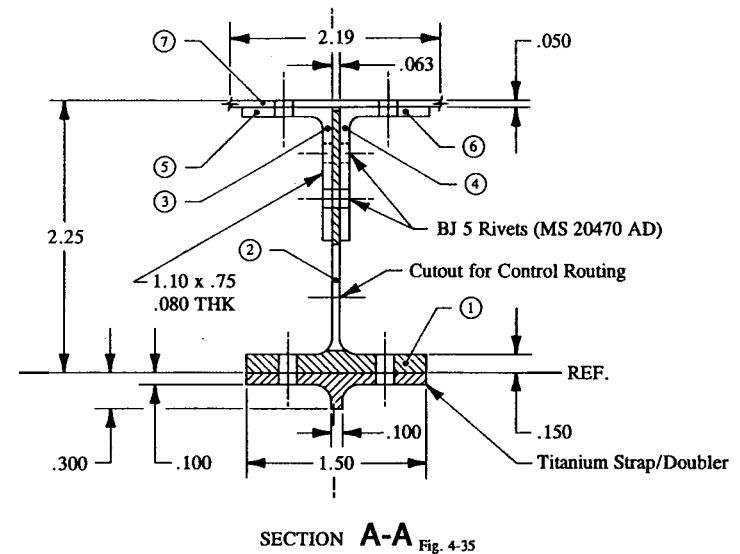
Cargo bay floor beam MOD sectional area detail.
